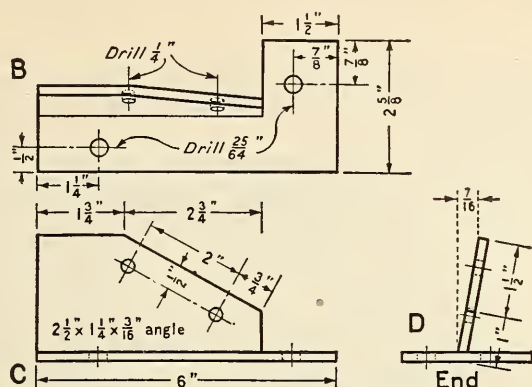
B, C, D.—Lower special throat-spring bracket, Case-Osborne corn binder
